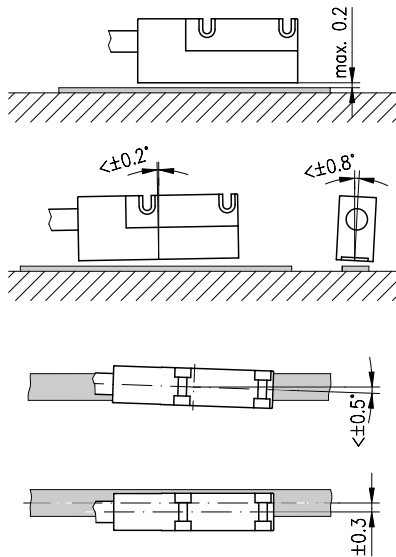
Mounting tolerances, dimensions in mm
